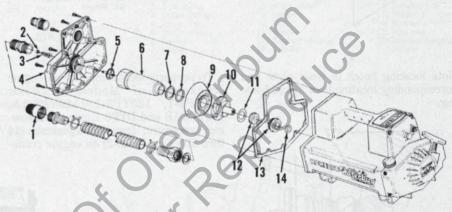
Exploded view of Model P100-1 pump. Collar (11) is used on later models. Later models are equipped with EPDM seals and gaskets and check valve (5) uses an EPDM "O" ring.
